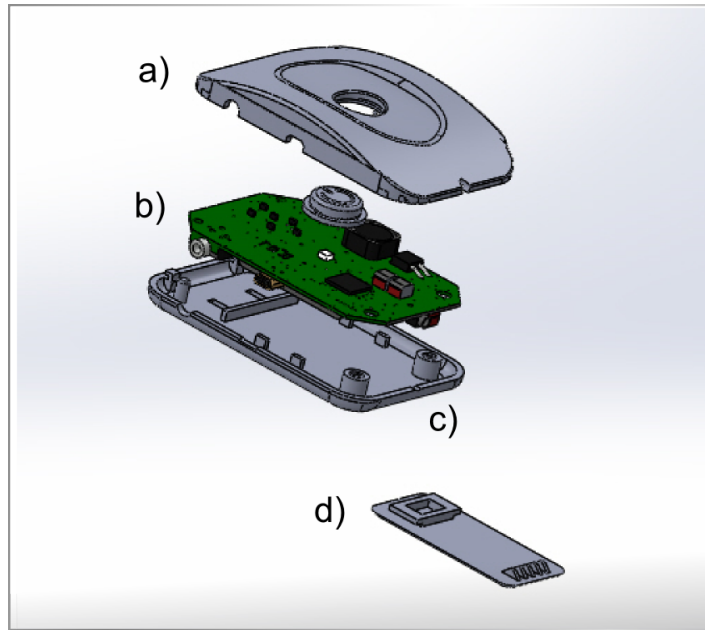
System assembly illustration: a) top case; b) PCB; c) bottom case; d) attachment belt.
